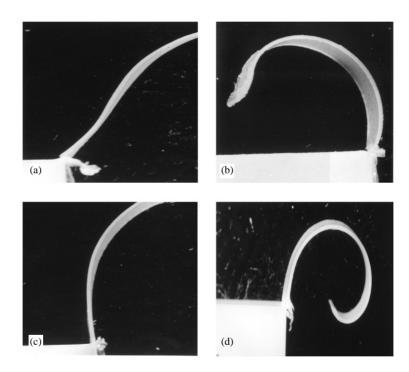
Continuous curly chips: (a) LDPE at 1 mm/min; (b) LDPE at 20,000 mm/min; (c) HDPE at 1 mm/min, and (d) HDPE at 20,000 mm/min. The cutting tool moved from the right to the left.
